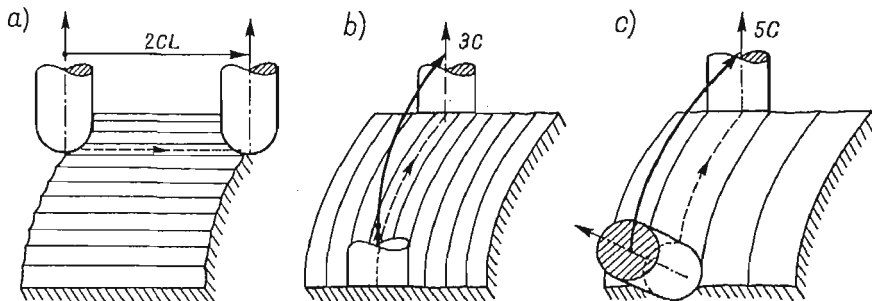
Machining on milling machines type 2CL, 3C, 5C
